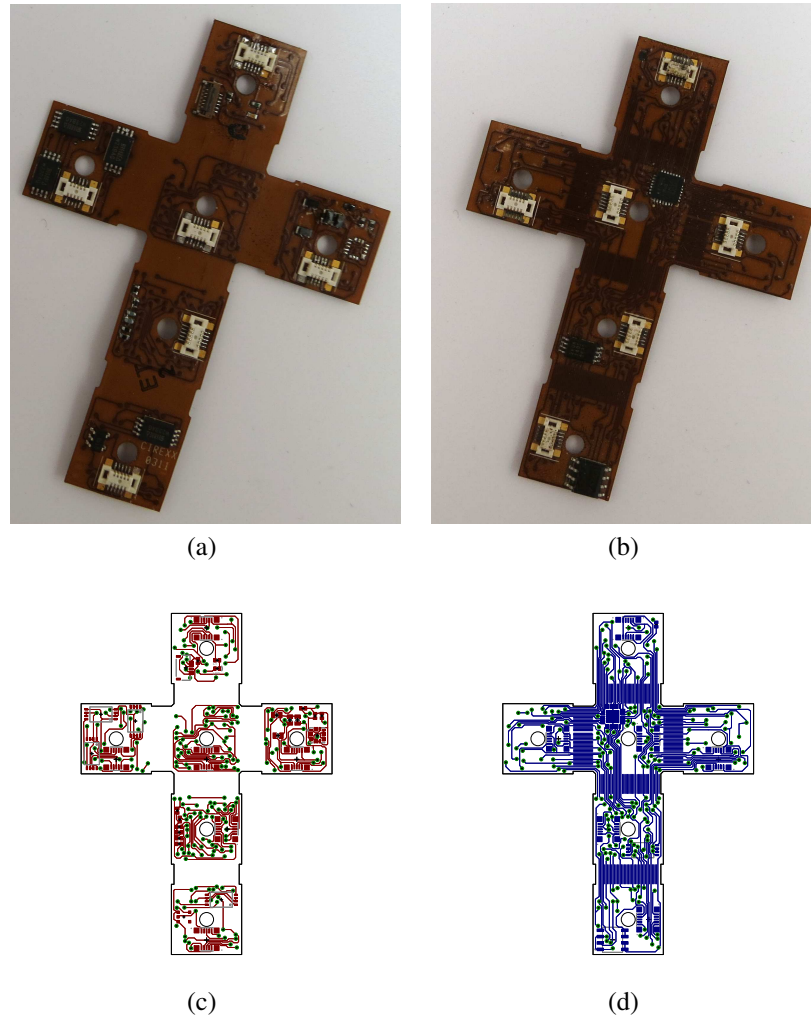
Photograph and schematic of main controller PCB. (a) Top view. (b) Bottom view. (c) Layout drawing, top. (d) Layout drawing, bottom.
